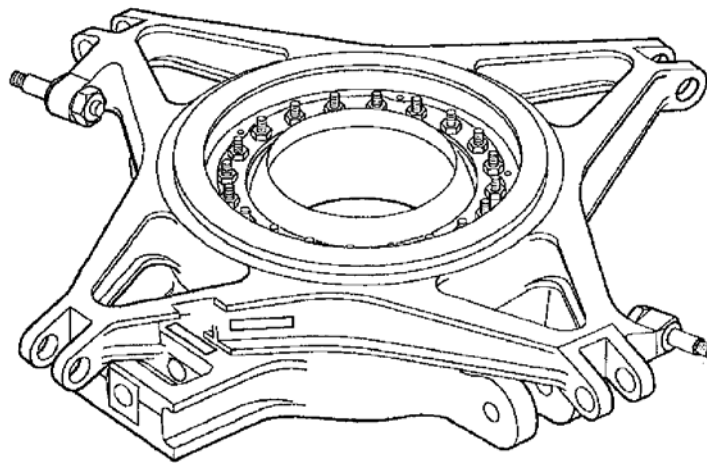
Main Rotor Swashplate Assembly (AH-64A/D)
